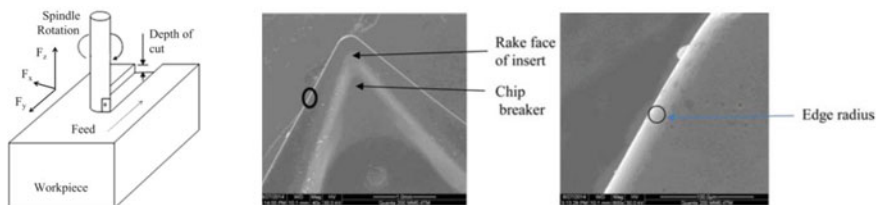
Geometry of tool insert with the cutting edges. *Image courtesy* Shunmugam [11] and Jagadesh and Samuel [9]
